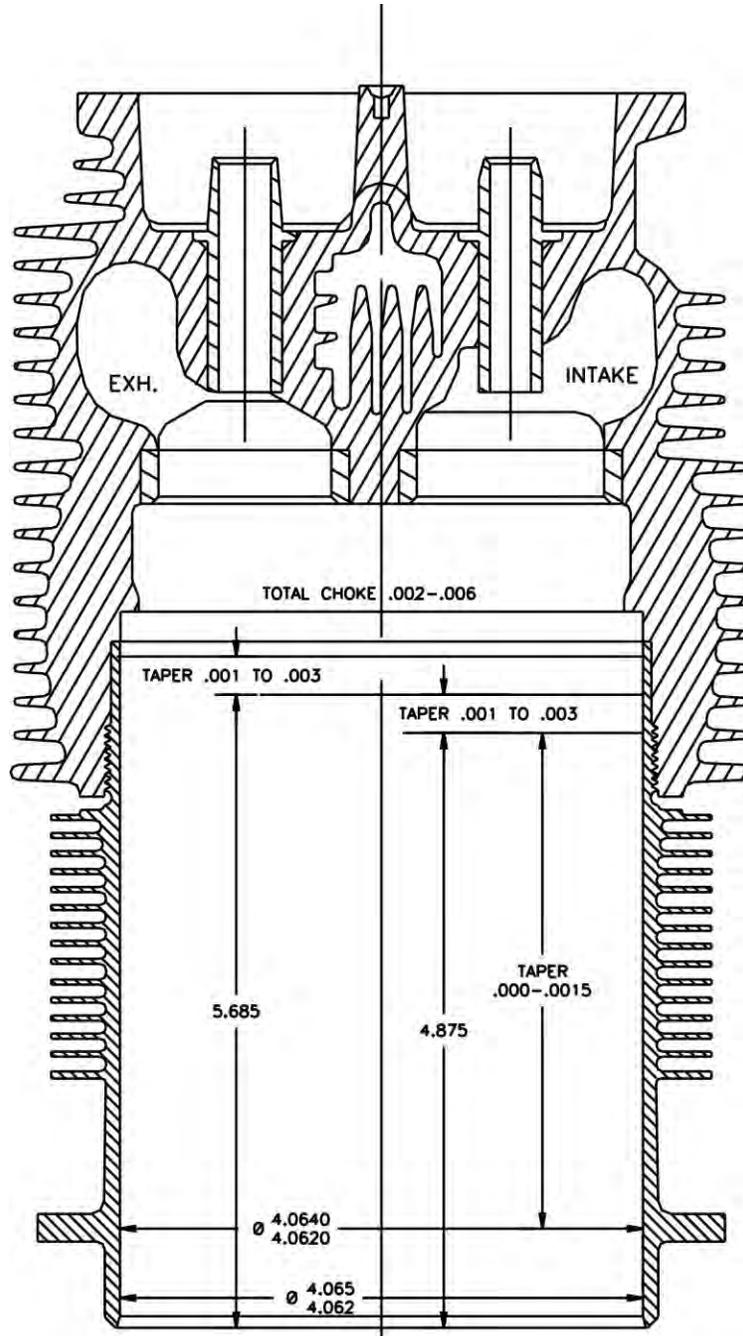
Typical Cross Section of AEC65314 Cylinder with barrel profile.
